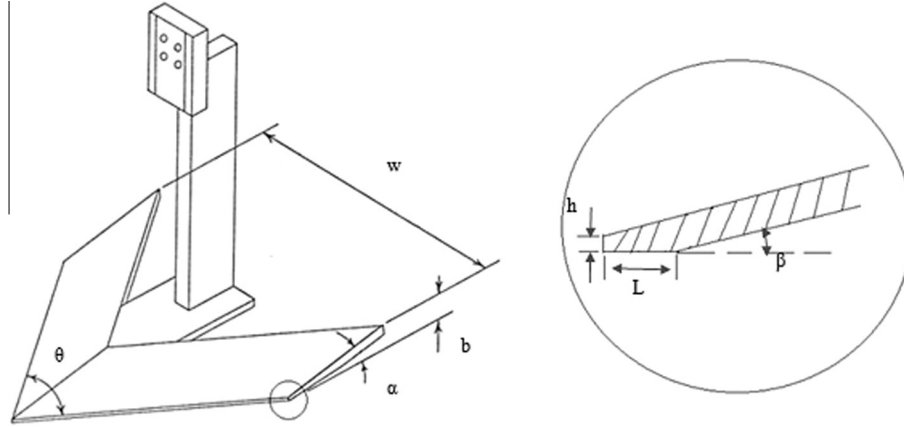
Definition of the sweep wing geometry. Wing geometry of w , width; b , lift height; α , rake angle; θ , sweep angle. Cutting edge parameters of h , cutting edge height; L , length of underside rub; β , angle of underside clearance [1].
